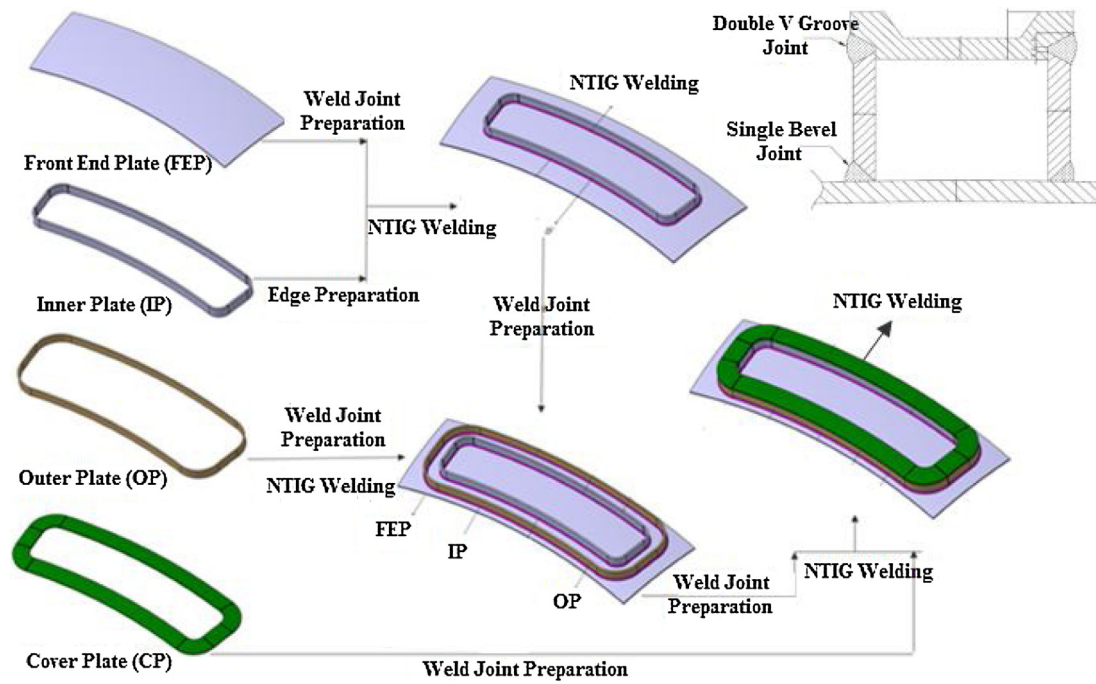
Schematic representation for weld sequence and encasing of winding pack.
